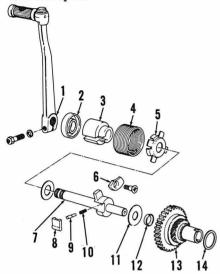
Kickstarter used on TS and TC 90 models. Engine may be started in any gear as long as clutch is disengaged.
